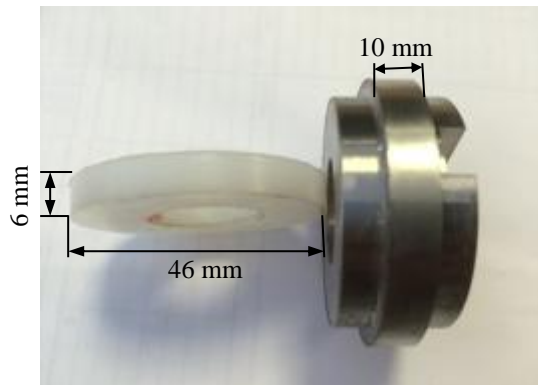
1- Disc Specimens of End Post and Steel Wheel
